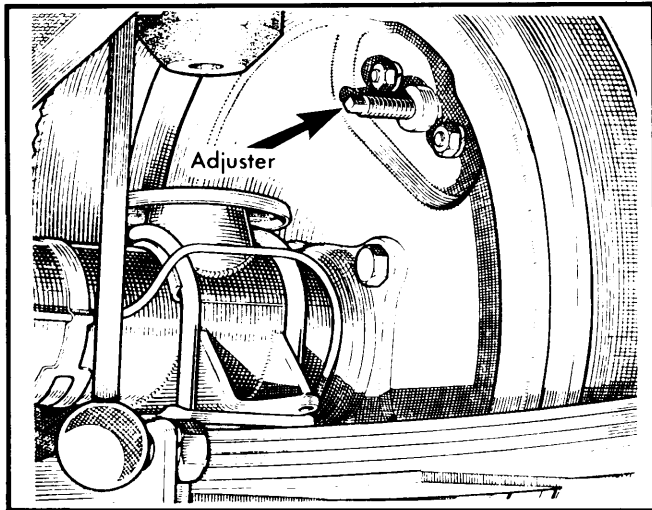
Rear Drum Brake Shoe Adjuster Location
